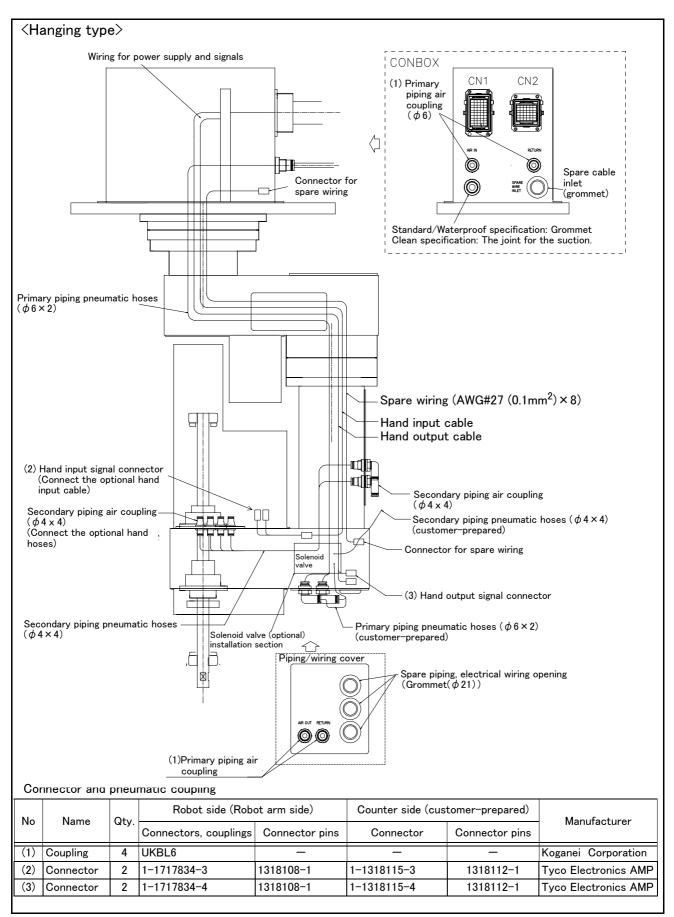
Wiring and piping for hand (Hanging installation type)
